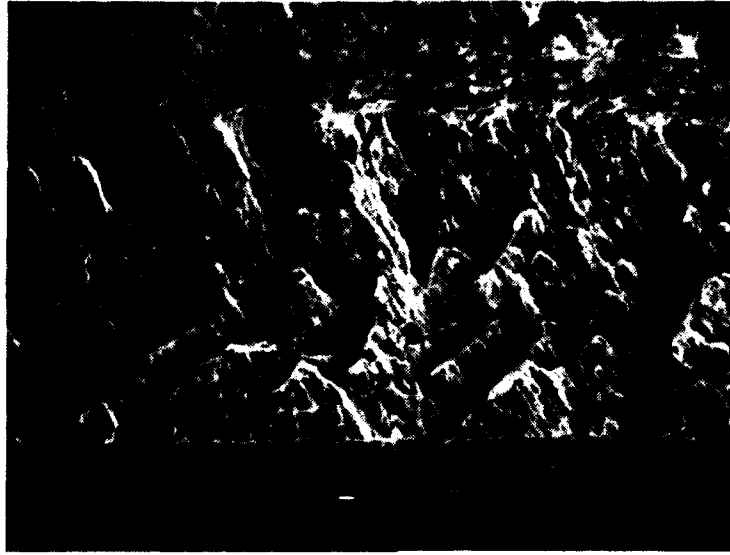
Crack growth region of temper embrittled HY 130 weldment x35
